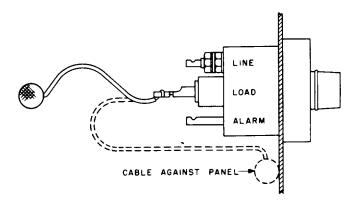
Fuse Blocks — KS-14169 and Similar Types — No. 14 Gauge and Smaller Wires
